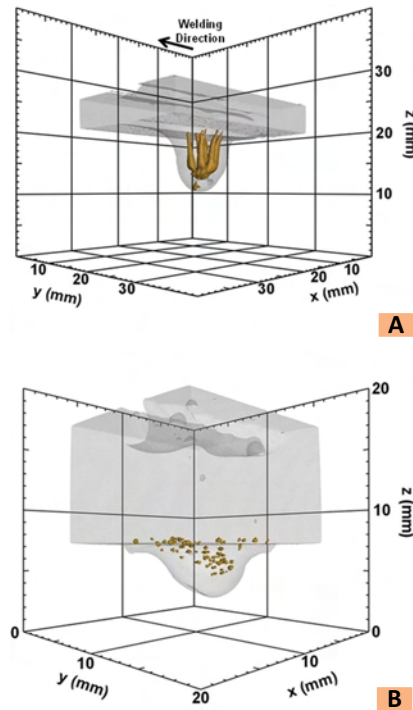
The internal structure of root defects in: A — Hybrid laser-gas metal arc weld in 4.8-mm-thick plate (weld 6). The direction of welding is indicated by the arrow. The strands of porosity that stretch from the bottom of the plate and connect in the center of the defect were common in all the hybrid welds where root defects formed; B — laser weld in 9.5-mm-thick plate (weld 3) as determined by X-ray computed tomography. Only individual pores are observed. Evidence of gouging due to material loss to root defects can be observed at the top of the plate.
